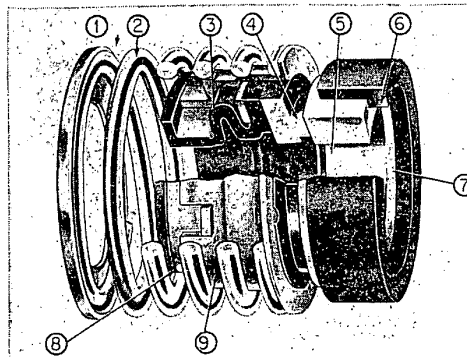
Face-contact general-purpose seal. (1) Spring retainer. (2) Spring. (3) Synthetic rubber bellows. (4) Sealing washer. (5) Lapped sealing faces. (6) Seat ring. (7) Floating seat. (8) Driving band. (9) Driving-band pin.
